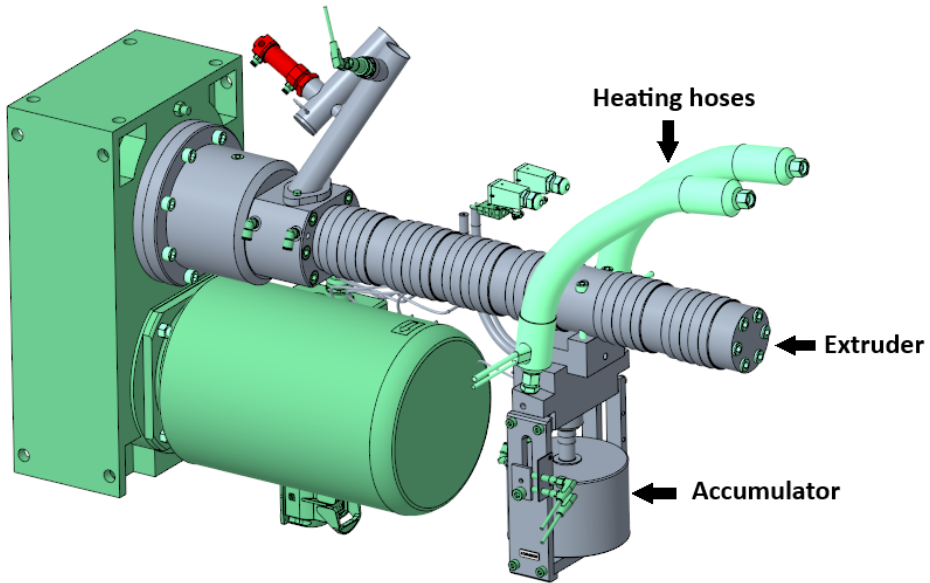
Assembly of extruder, heating hoses and accumulator in the LFU.
